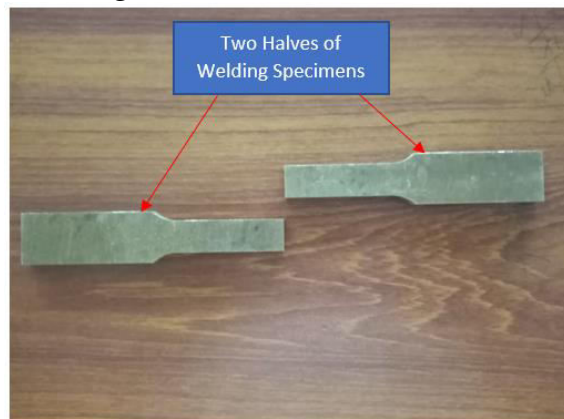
Manufactured Specimens as per ASTM Standard E8/E8M-13a in two halves
